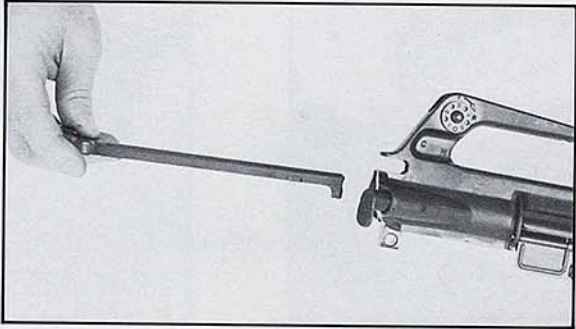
BOLT CARRIER ASSEMBLY AND CHARGING HANDLE REMOVAL
